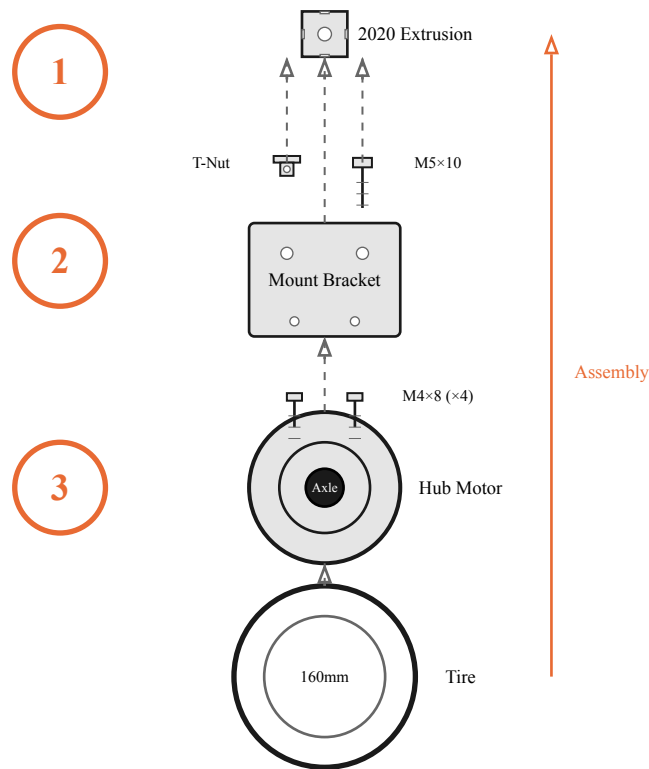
Exploded view: (1) Insert T-nuts into extrusion, (2) Bolt bracket to frame, (3) Attach motor and tire
